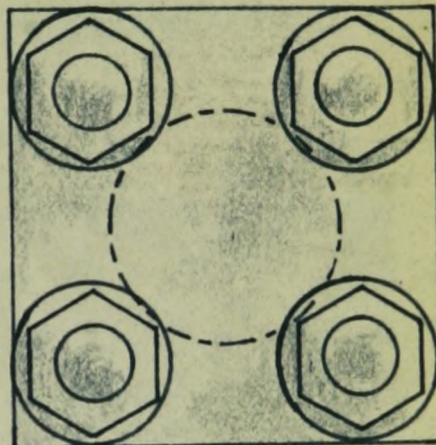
Gas-tight welded Inconel diffusion couple end holder container, $\frac{1}{2}$ actual size.
